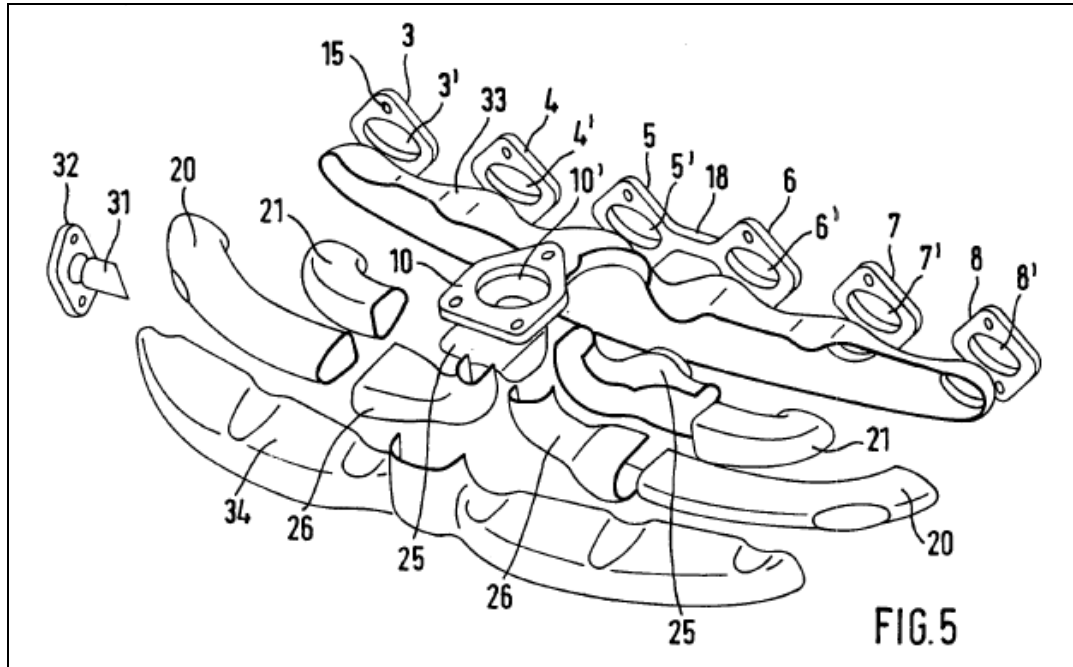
Air gap insulated exhaust manifold with connected inlet flanges [DE 10102637 A1 2002]
